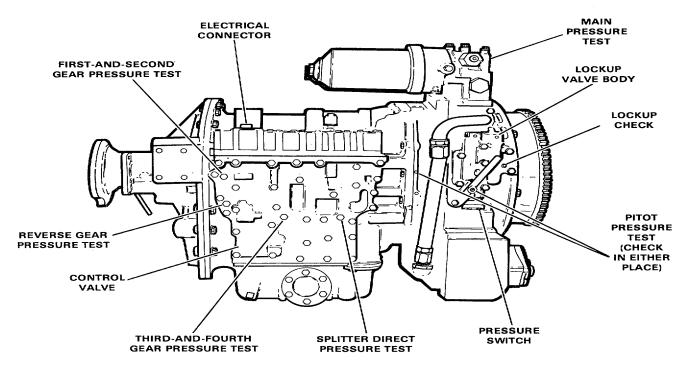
Pressure Check Points on Electric Control Valve Body and Transmission
